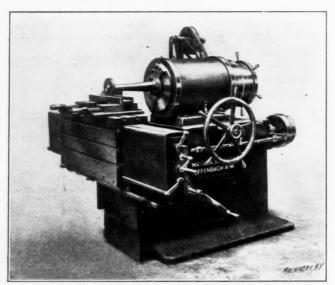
Internal Grinding Machine with Planetary Motion Locked, used for Surface Grinding.
